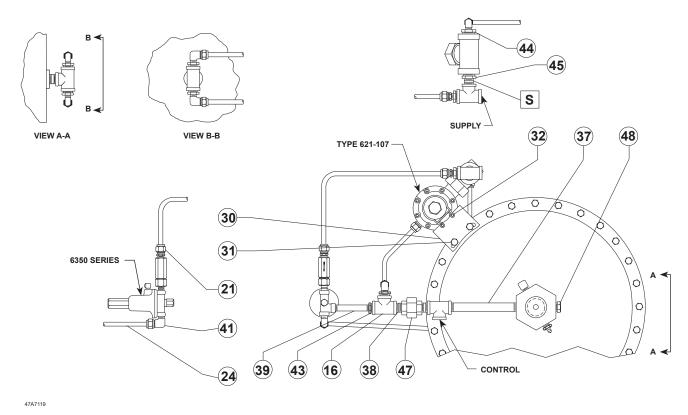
Type 1098-EGR with Type Y600AM Mounting Parts
